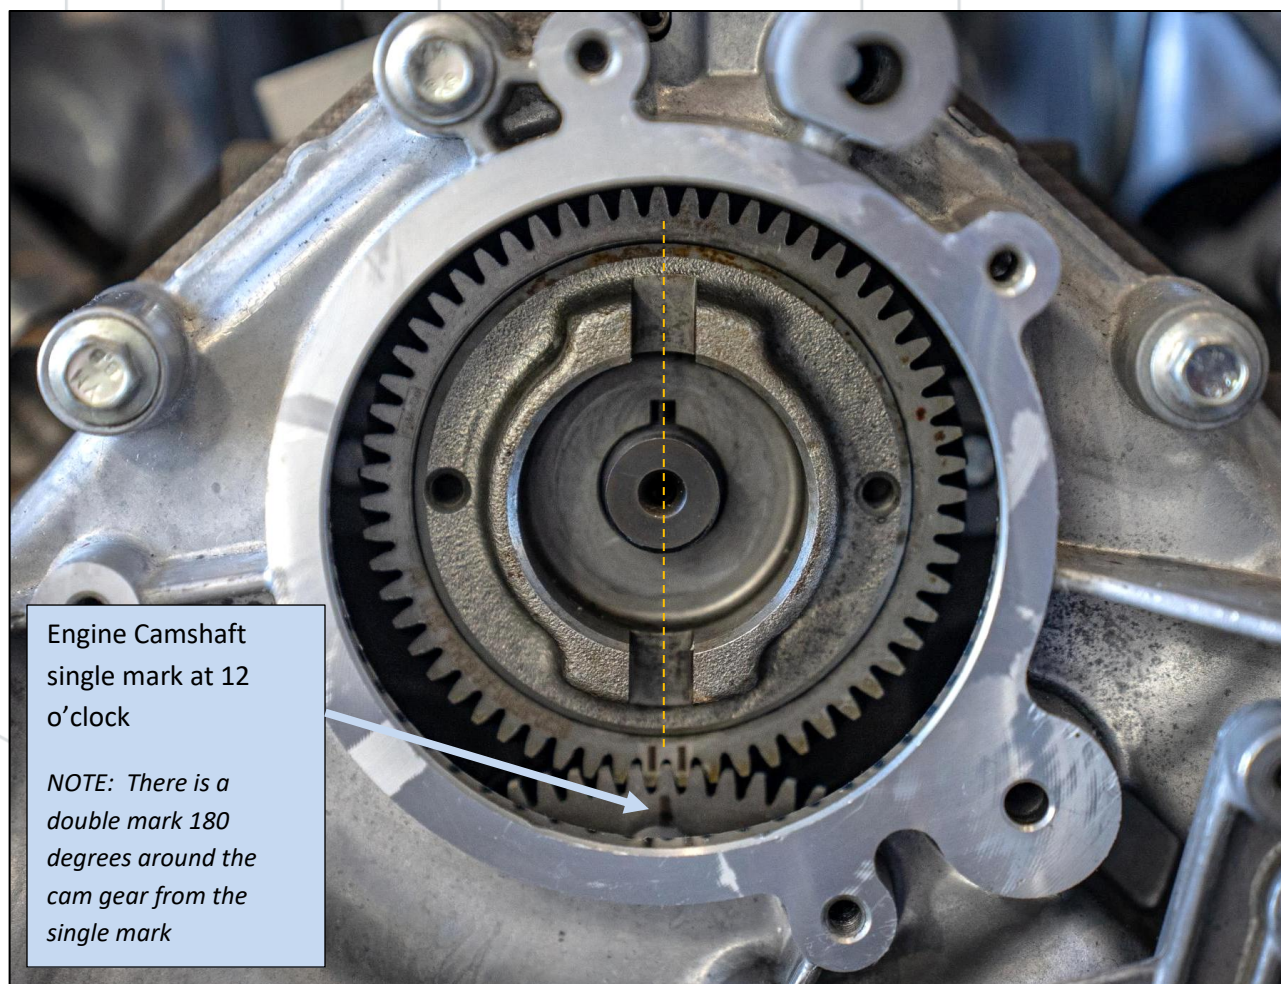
Rotate engine to TDC – Single Mark on the Engine Camshaft at 12 o'clock
